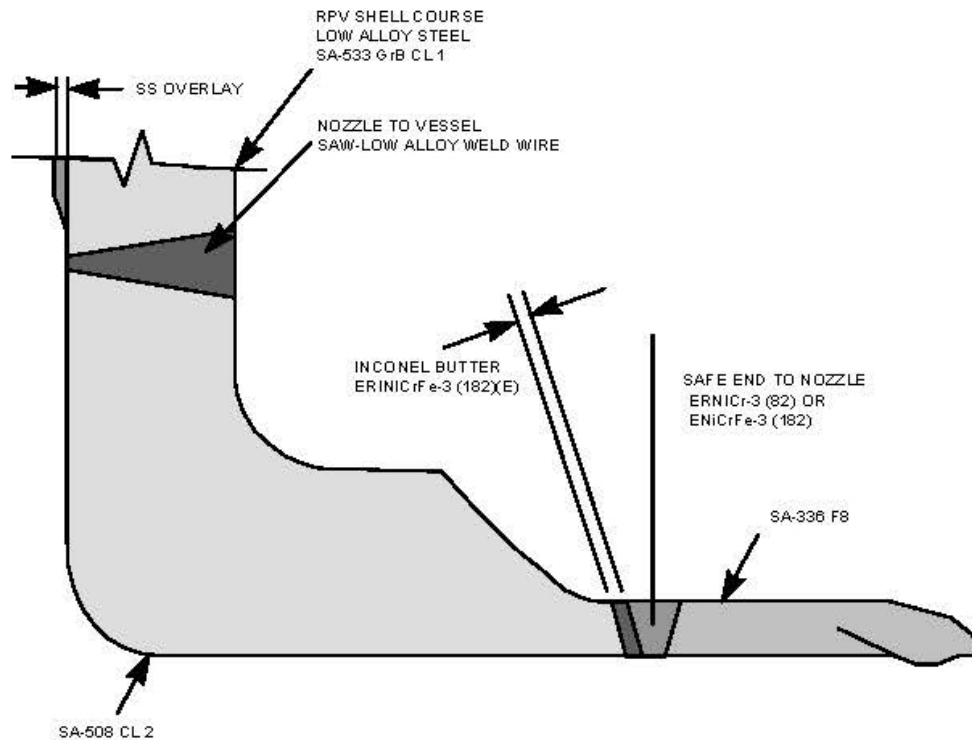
Typical BWR recirculation outlet nozzle, nozzle butter, weld, and safe end.
